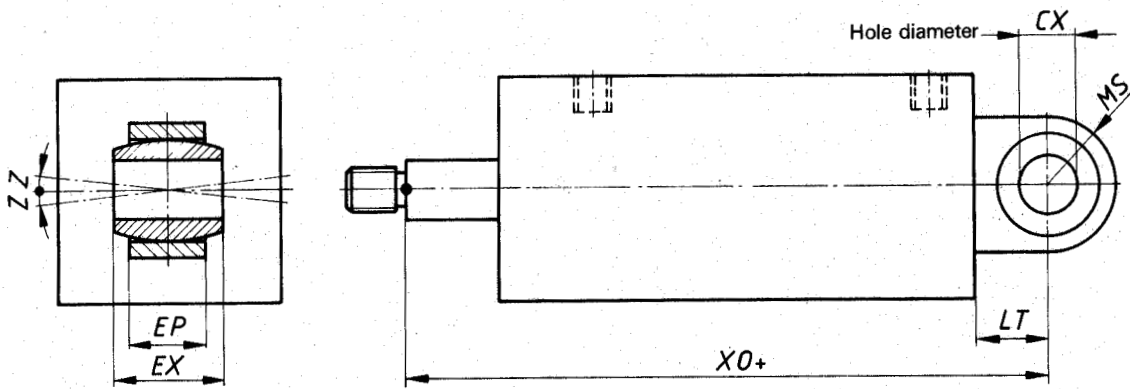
MP5 — Cap fixed eye with spherical plain bearing mounting
